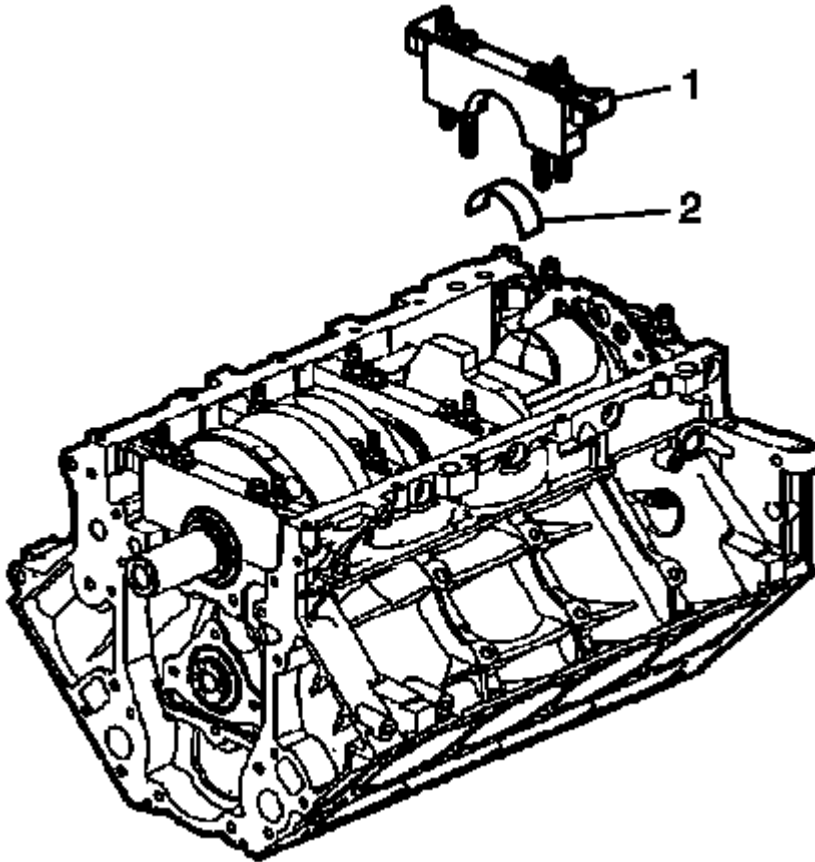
View Of Bearing Cap, Bolt & Bearing Half
